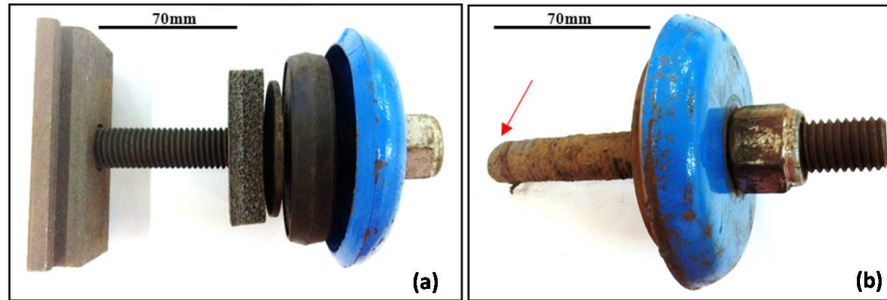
Picture of (a) a new screw used in Ball mill covering system; (b) a failed screw. The red arrow indicates the fractured area.
